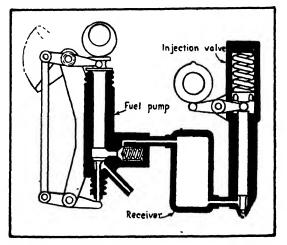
THE R.A.E. TIMED INJECTION VALVE METHOD
